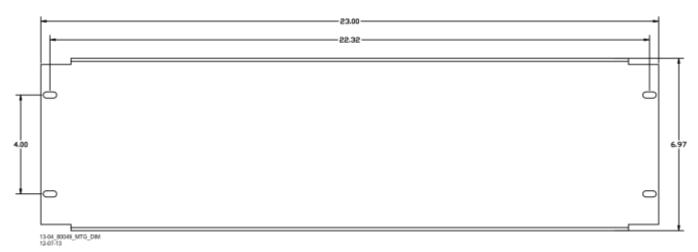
DC Shunting Enhancer Panel Mounting Dimensions
